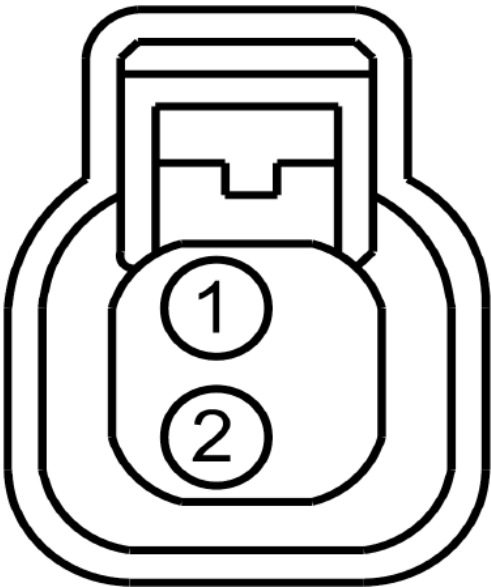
Windshield Wiper Motor Connector End View (C125)
